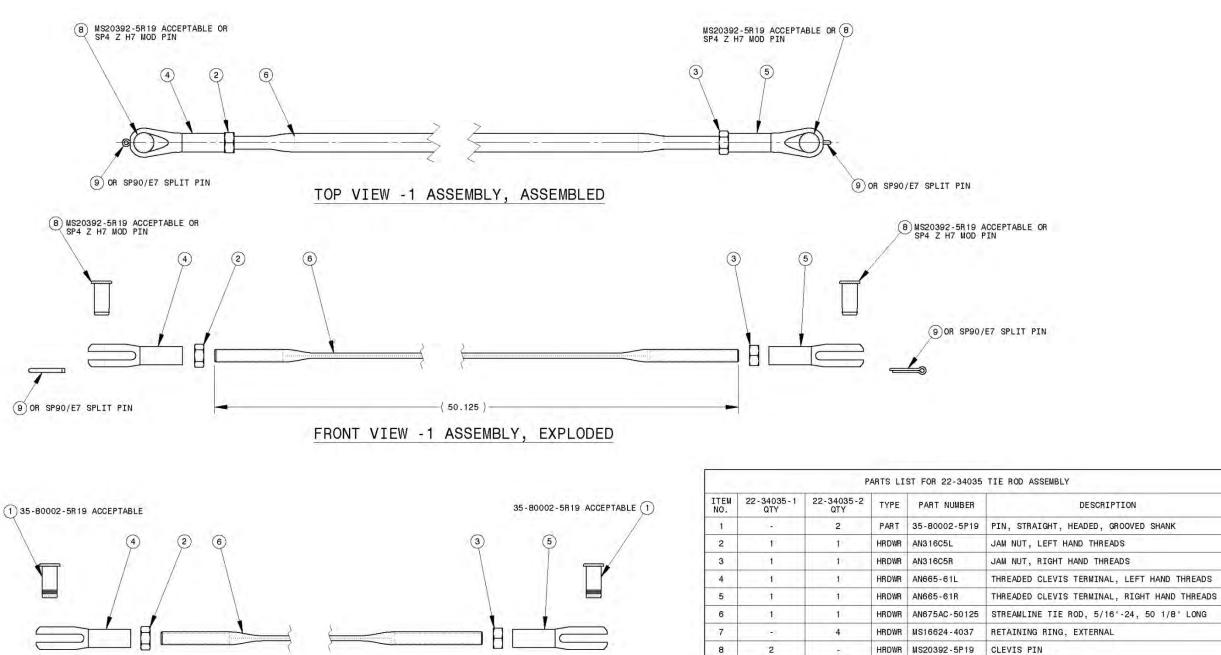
Parts Listings for Flying Wires (Tie Rod Assembly) Installation, 22-34035
